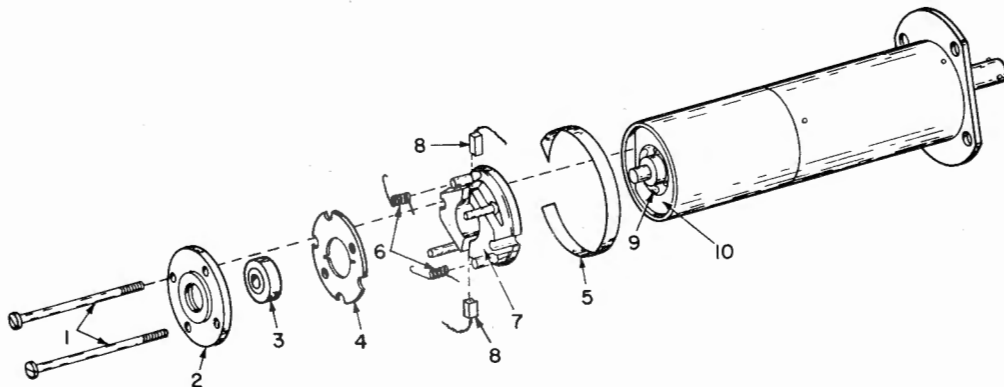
R-F Tuner, Band Motor, Exploded View
